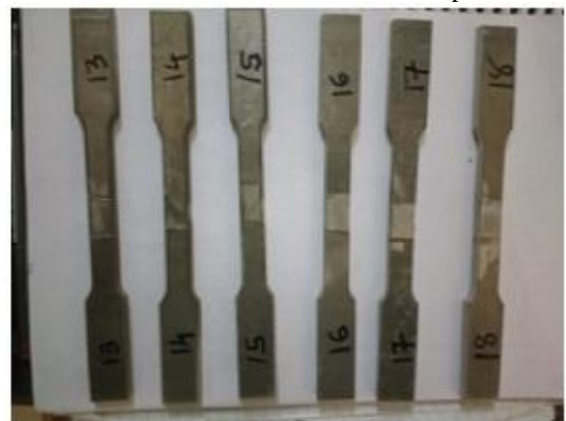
specimen for tensile test as per ASTM E8M Taking into account tensile testing and defect in FS weld sample no. 10 (Triflute pin profile, tool rotation speed = 800 rpm, tool transverse speed = 40 mm/min) was selected for fatigue testing. From sample no. 10 four pieces are prepared for fatigue testing as per ASTM E0466.
